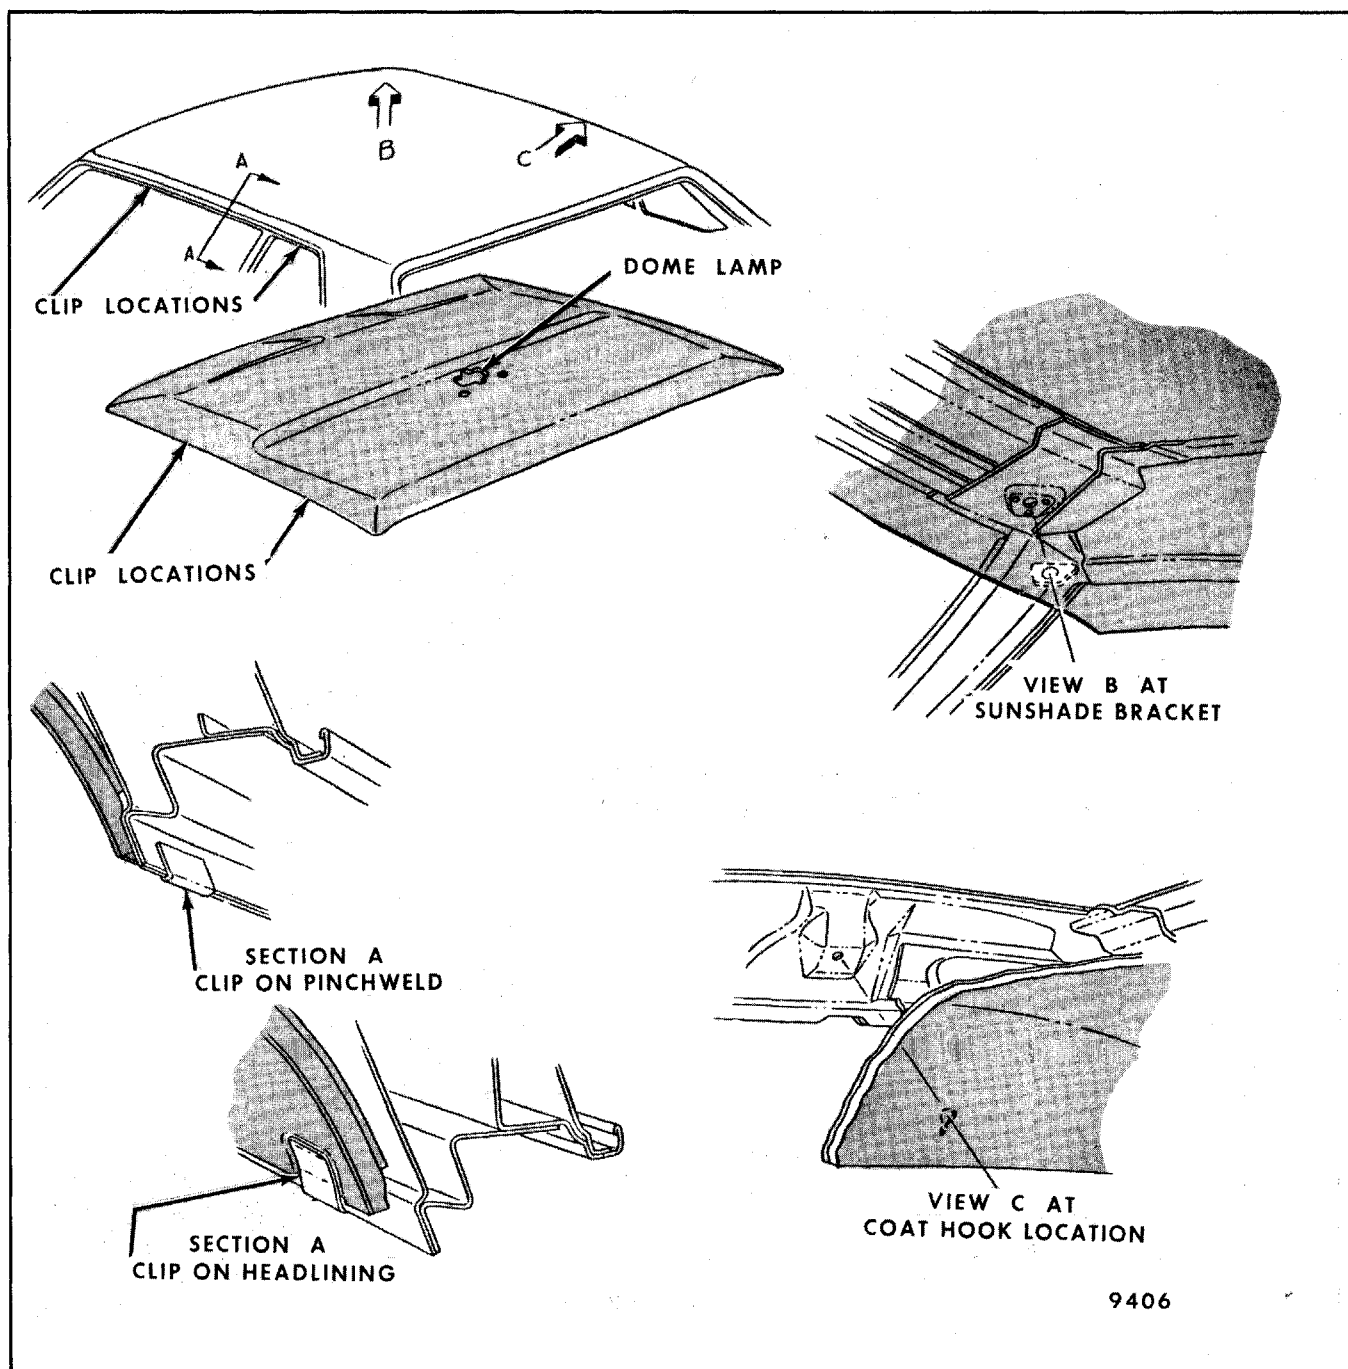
Formed Headlining Assembly - "B,C" Styles Typical
